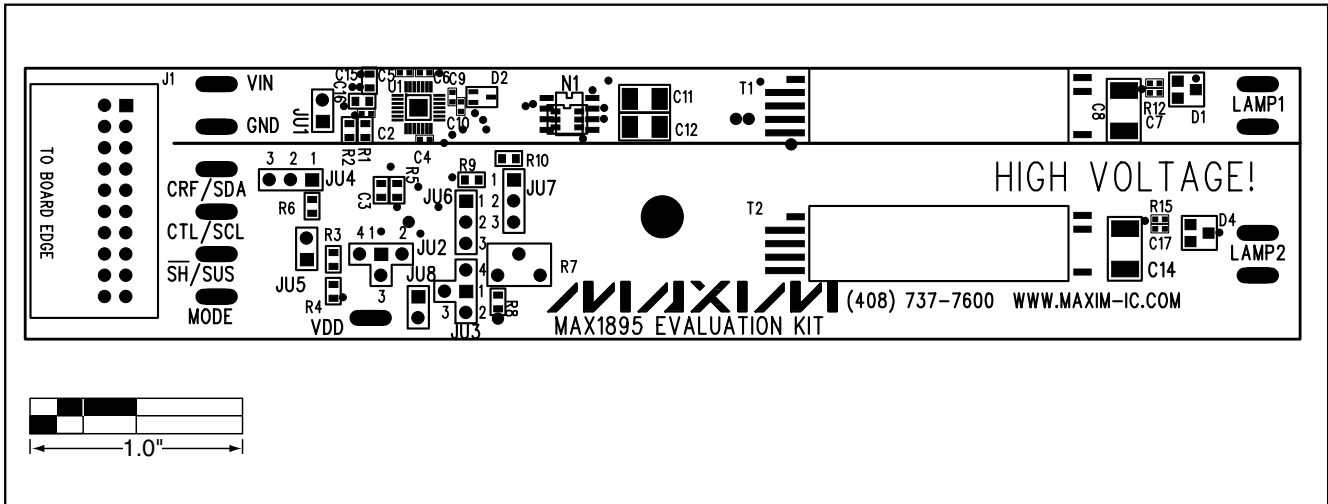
MAX1895 EV Kit Component Placement Guide—Component Side
